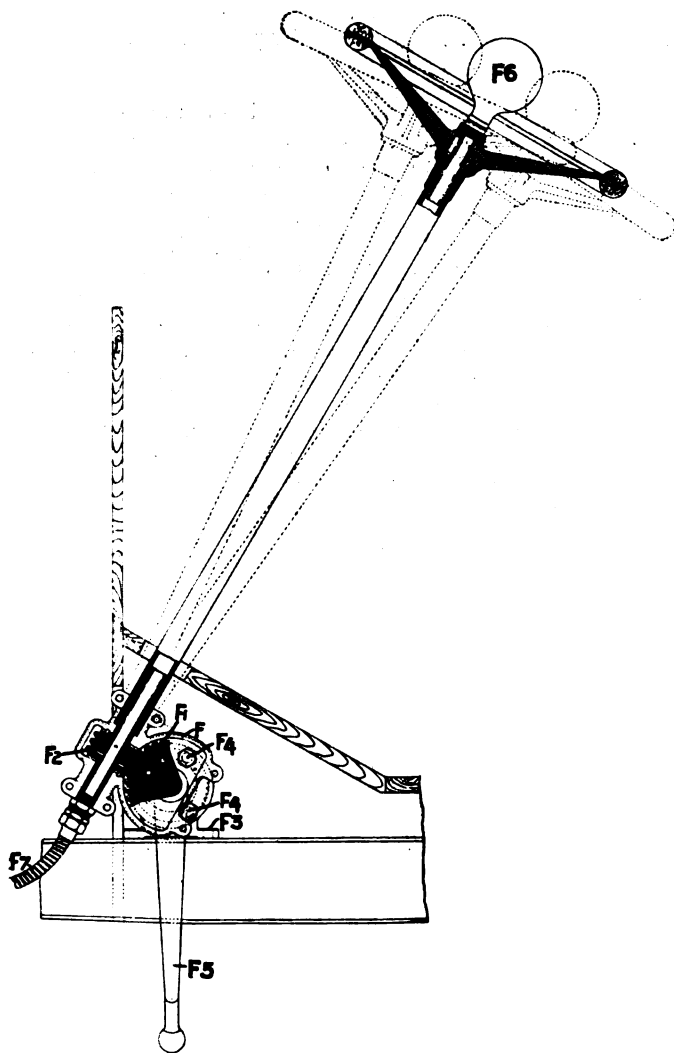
Section through the Steering-Gear on the Brotherhood Car, showing the method of adjusting the rake of the Steering-Pillar.
